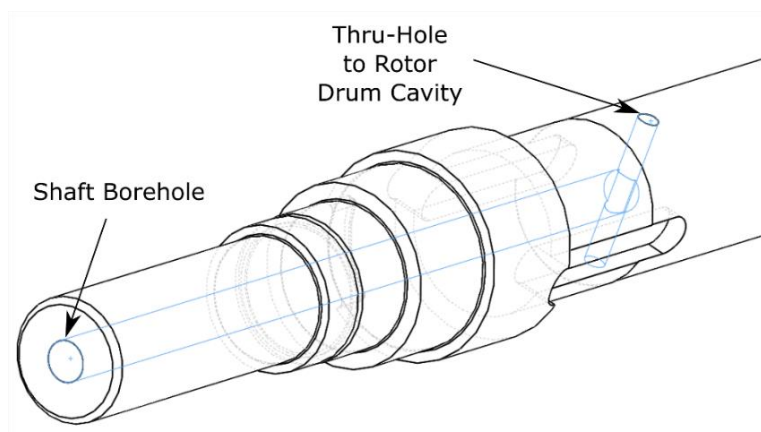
Existing Bore in Front End of Shaft Connecting Rotor Drum and Nose Cone Cavities
